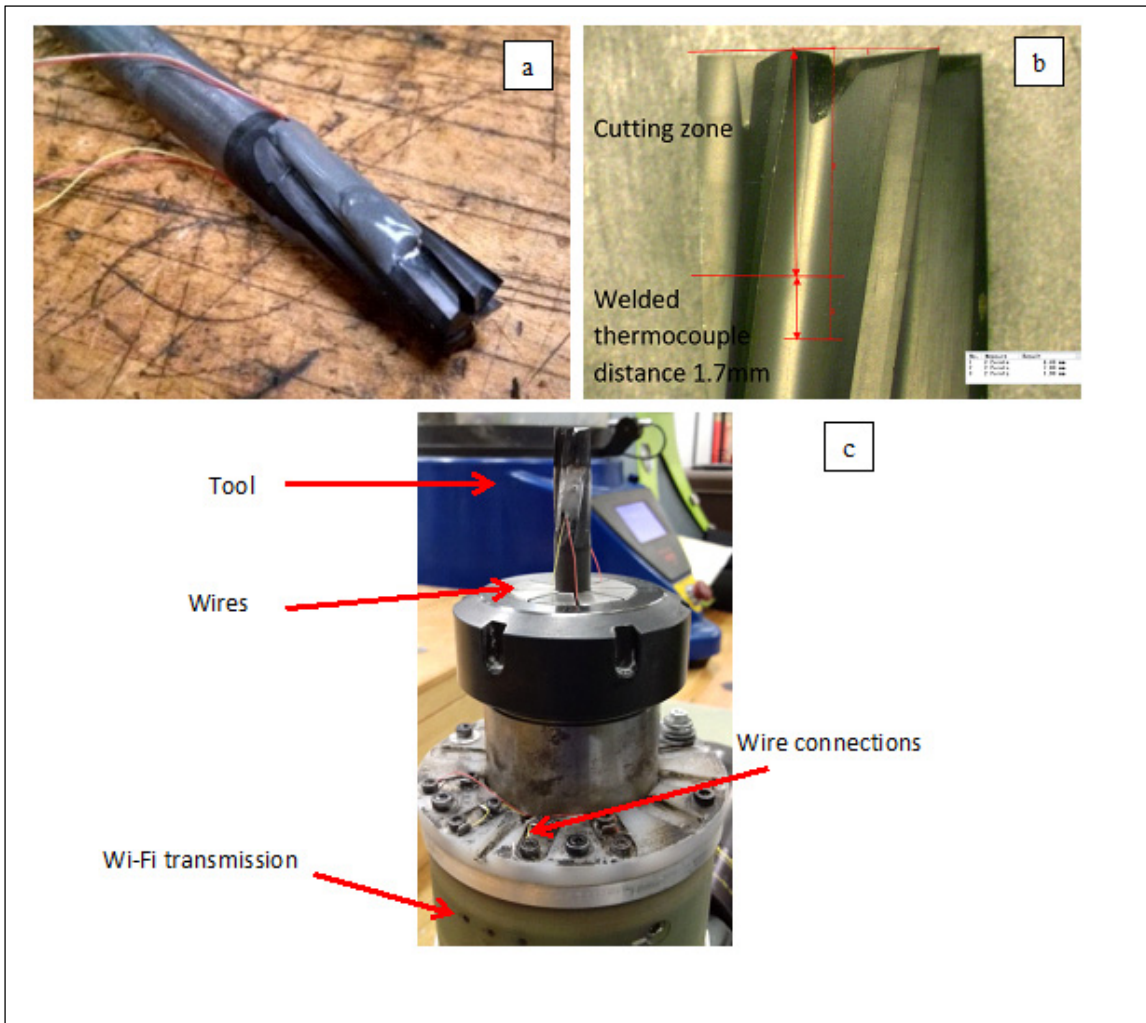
Cutting tool with thermocouples (a), cutting zone (b), and Wi-fi transmission of signals (c)
